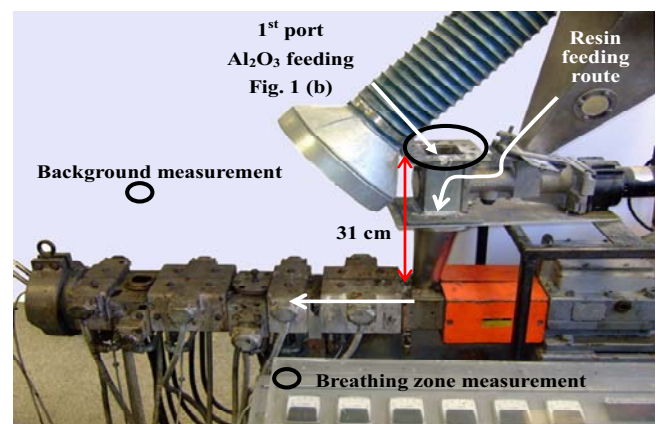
(a) Layout of twin screw extruder and measurement locations.
